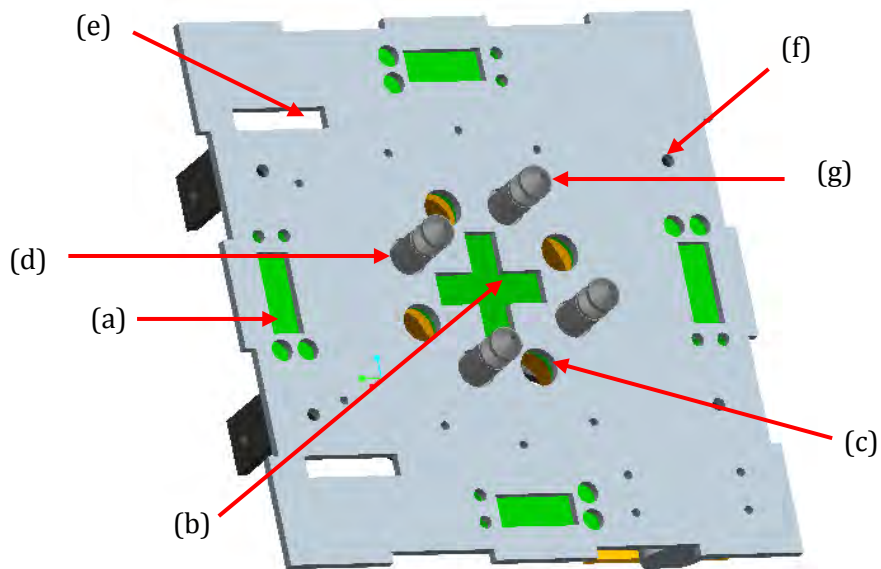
A CAD model of the outer structure of the final connector design showing (a) IR PCB grooves, (b) the centrally located electrical contact groove, (c) One of four *inlet* bolt grooves, (d) One of four *outlet* bolt grooves each with its own spring bolt assembly, (e) One of two wheel grooves, (f) One of several fastening grooves and (g) a docking bolt of one spring bolt assembly.
